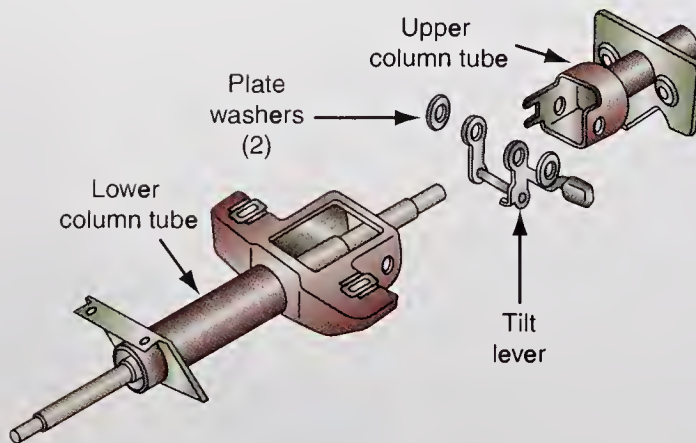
Removing upper column tube, tilt lever assembly, and plate washers.
